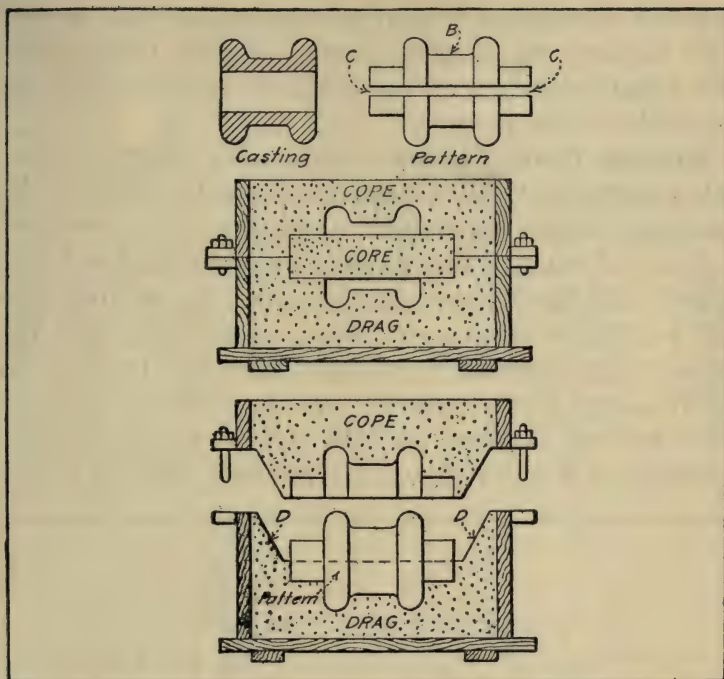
TWO METHODS OF MOLDING A PATTERN WITH FLANGES
